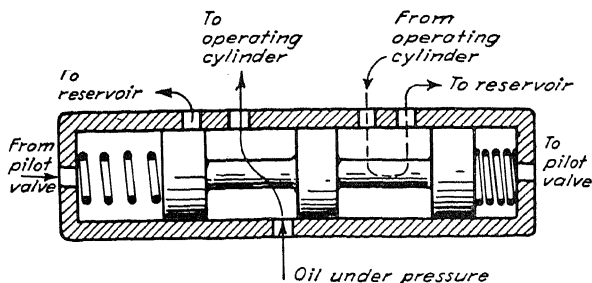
Spool-type 4-way valve operated through a hydraulic relay circuit controlled by a pilot valve. (Courtesy of Product Engineering.)
